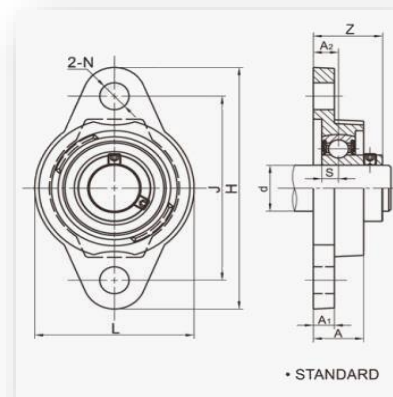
12mm Inner Diameter Zinc Alloy Pillow Block Flange Bearing
